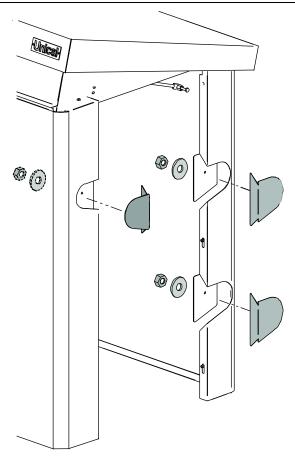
Caps and Plugs Used for Closing Up Vacated Gas and Hydraulic Connection Openings
